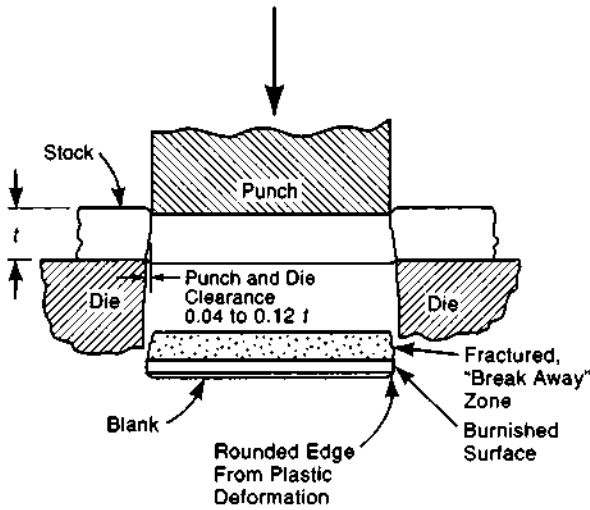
C4 The shearing action of a blanking punch and die. Note the edge of the blank which is typical of all sheared, blanked, or punched parts. There are three different edge areas: 1) the area of plastic deformation where the die edge first impinges the sheet, 2) the burnished area where pure shearing takes place, and 3) the breakaway area where the metal sheet fractures.
